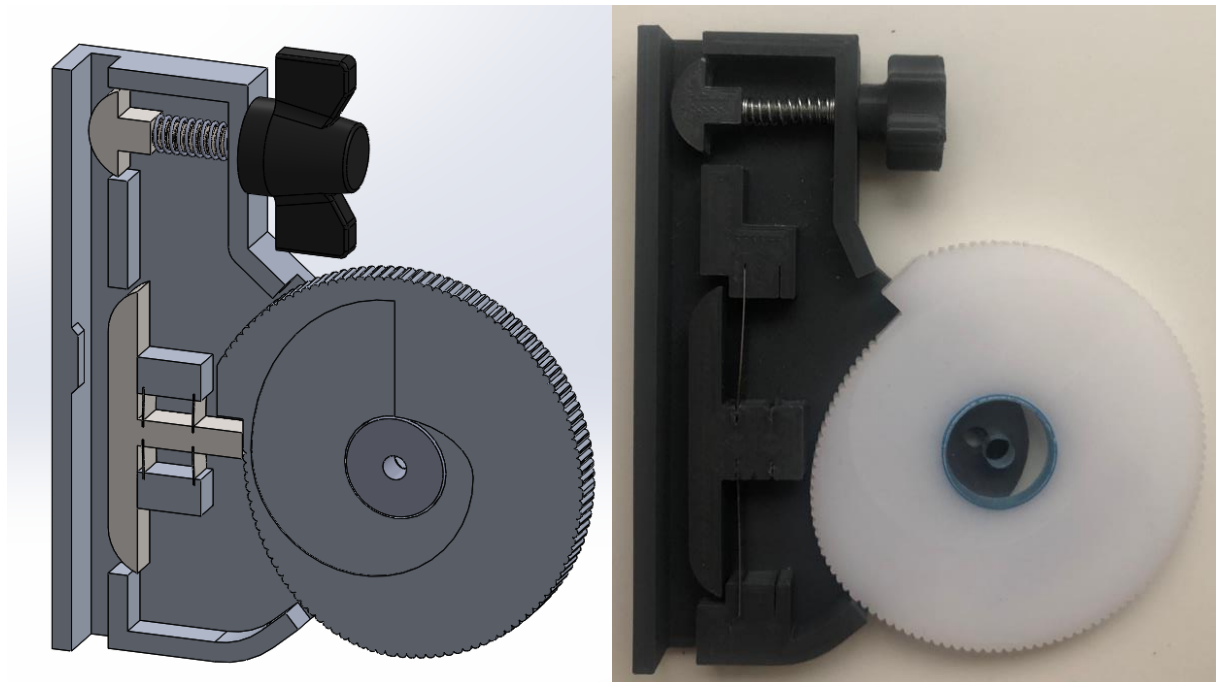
Frontal view of the design v1 CAD model (left) and prototype (right). Shown without housing cap.
